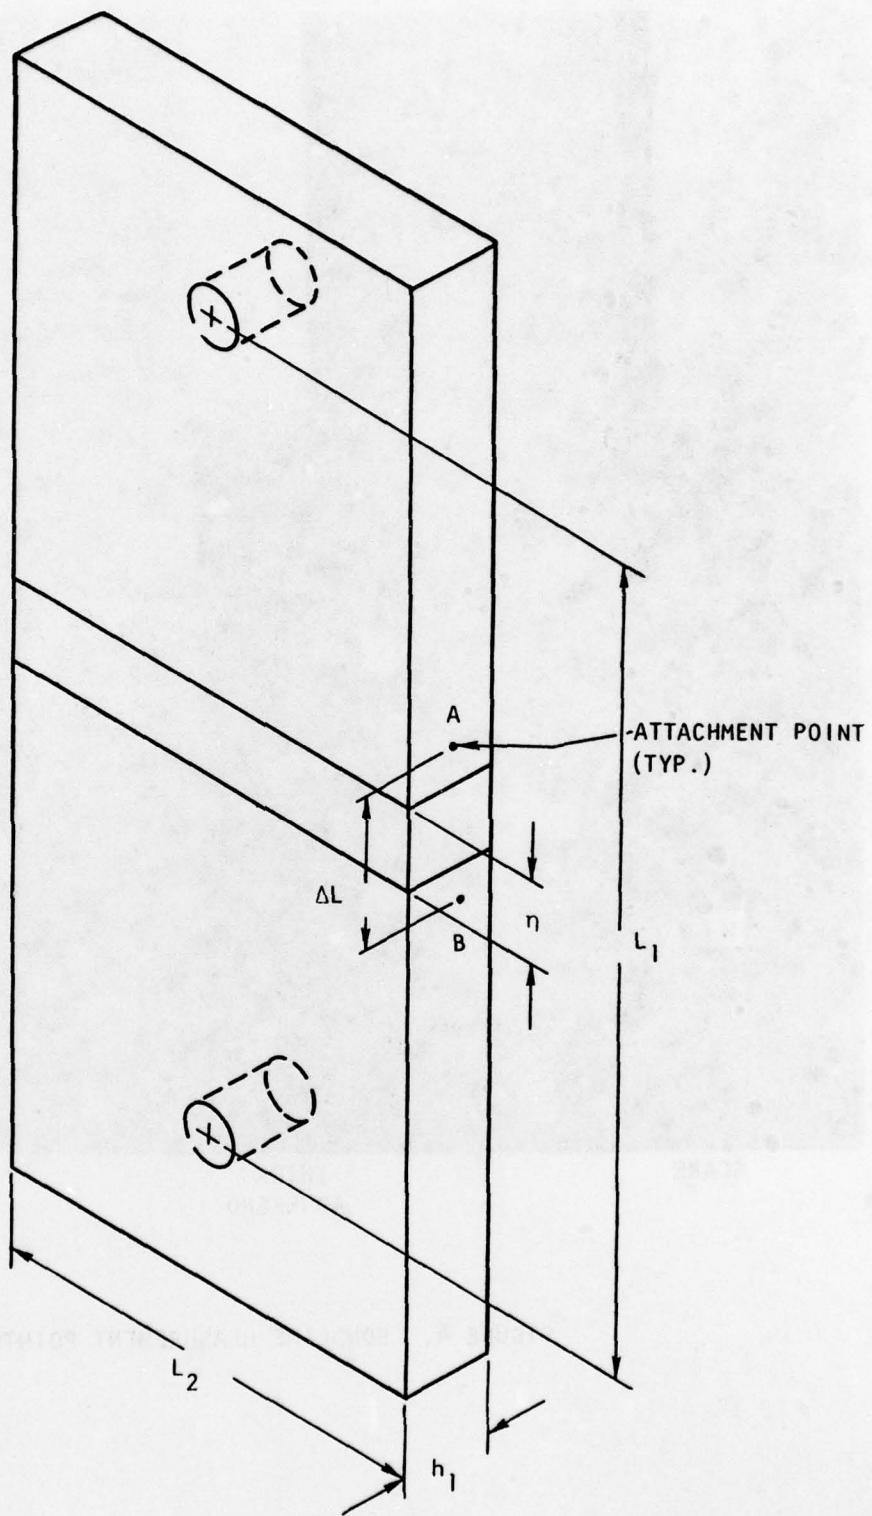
TENSILE SPECIMEN OPTIMUM ADHESIVE TEST SPECIMEN GEOMETRY.
